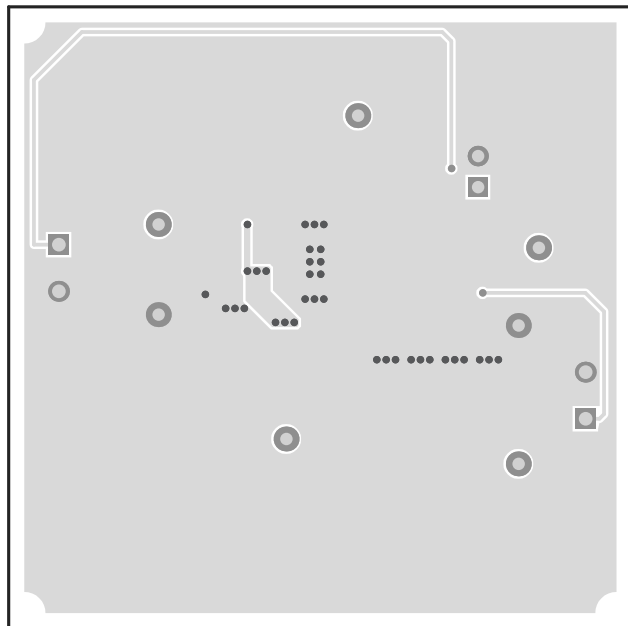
TPS54336EVM-556 Bottom-Side Layout
